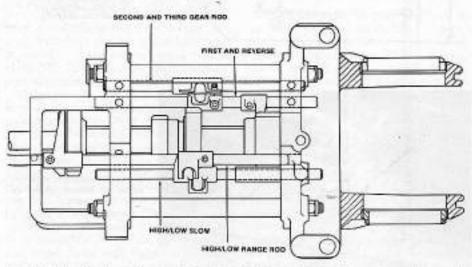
View showing shift rod positions in 1190, 1290 and 1390 model synchromesh transmis-
